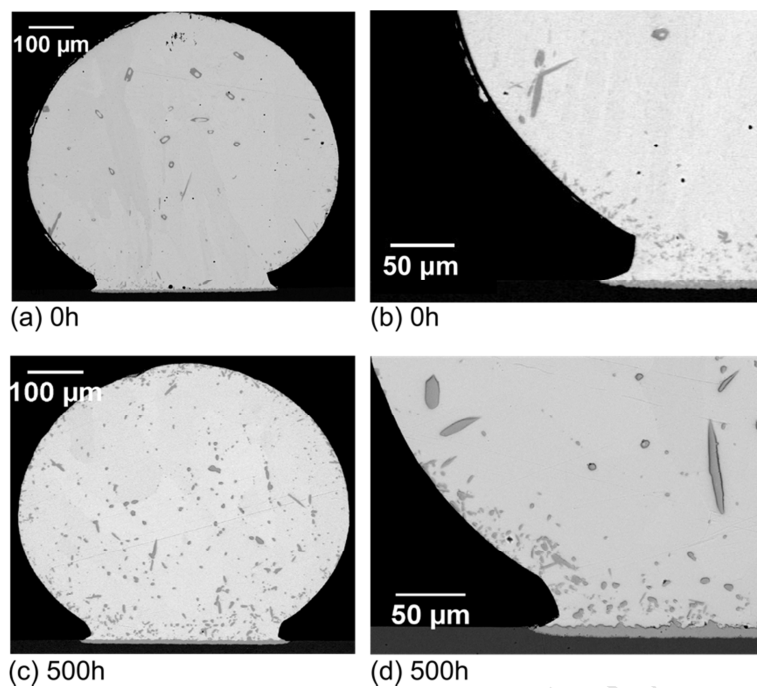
Cross-sectioned views of Sn-0.7Cu-0.4Zn-0.03Ni/Cu BGA solder joints under (a-b) as-reflowed; (c-d) 500h ageing;
